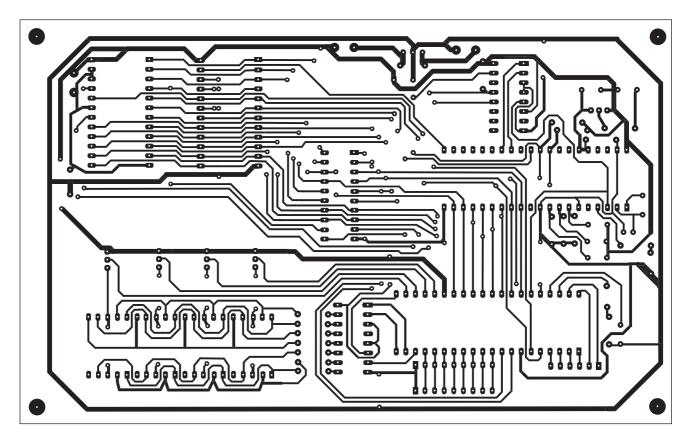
Actual-size, single-sided PCB layout for the circuit
